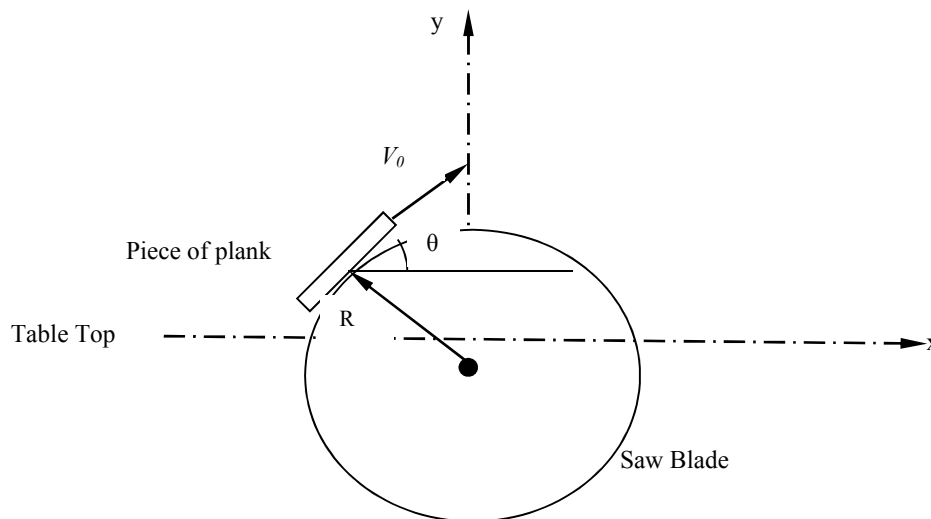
PIECE OF PLANK IN CONTACT WITH SAW BLADE
